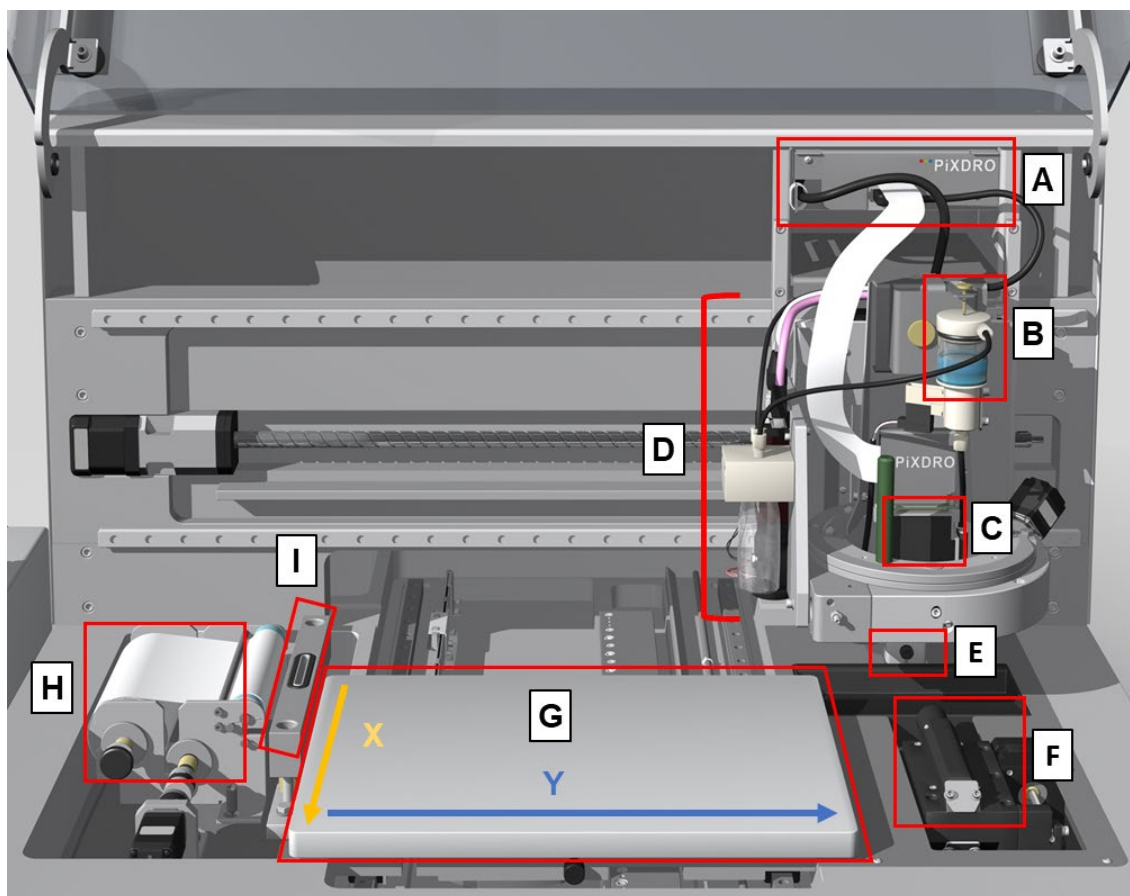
Detailed 3D insight into the inkjet printer with opened cover and exemplary mounted KM512SHX print head located in the service position. A: head personality boards (HPB), B: ink supply, C: print head, D: print head assemblies (PHA), E: stroboscopic LED, F: CCD camera, G: substrate table, H: wiping station, I: capping station
